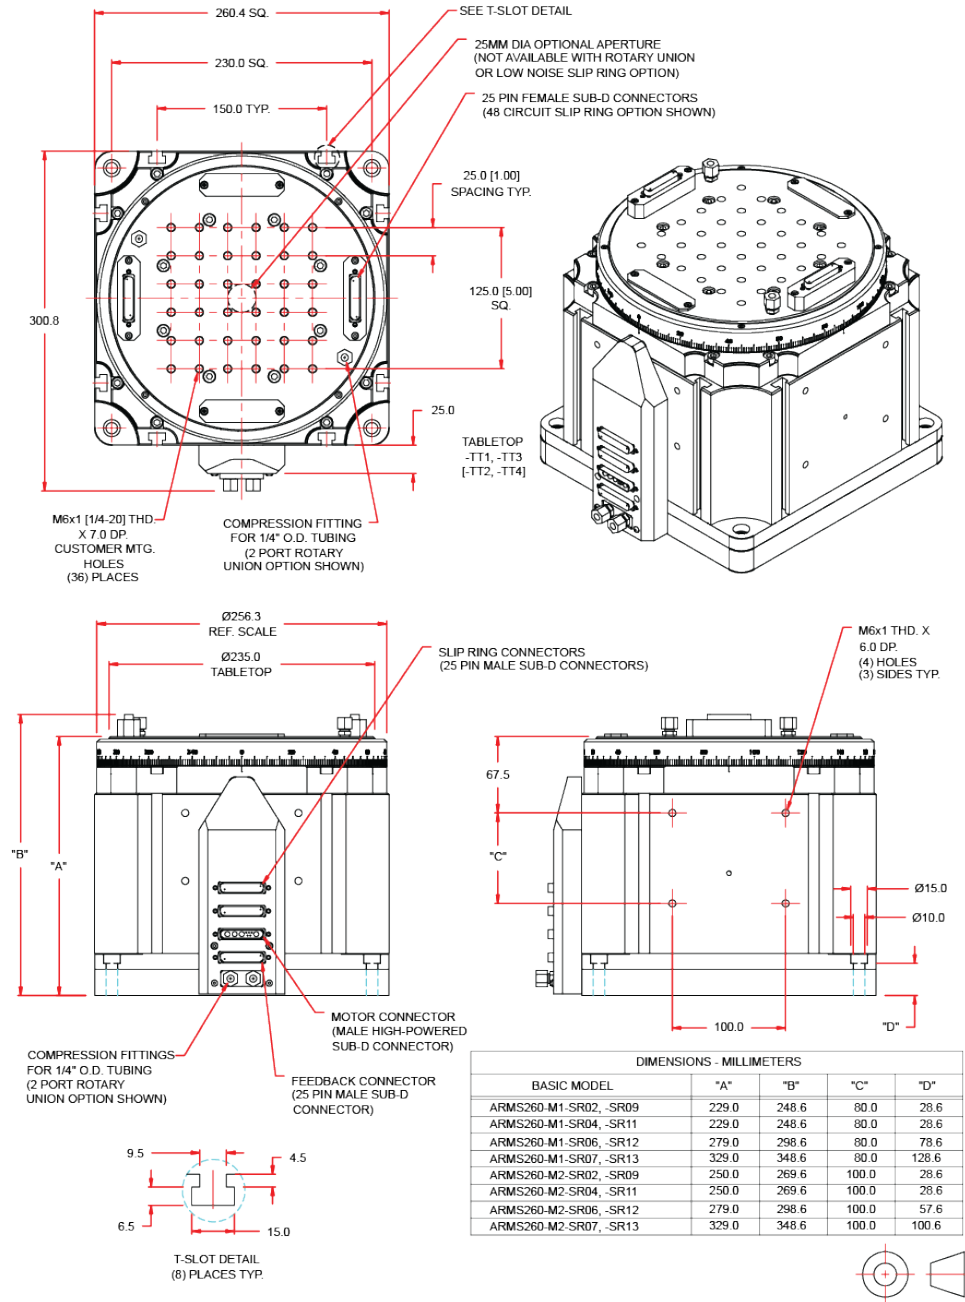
ARMS260 Dimensions (-TT1, -TT2, -TT3, -TT4)
